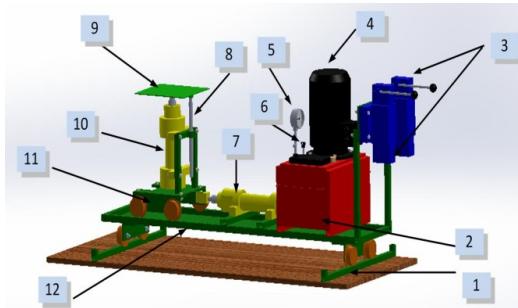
System for adjusting the hydraulic parameters-components: 1-rolling track; 2-tank; 3-manual distributors; 4-electric engine and pump; 5-manometer; 6-regulator; 7-hydraulic cylinder with horizontal movement; 8-guide; 9-workbench; 10-hydraulic cylinder with vertical movement; 11-small metallic frame; 12-large metallic frame.
